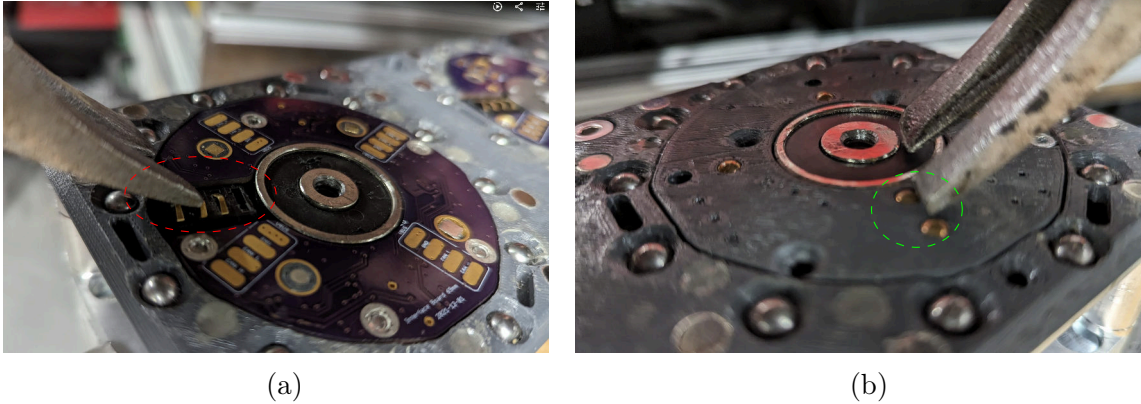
Visual illustration of two versions of the connector that (a) fails the hammer test due to an easily damaged spring loaded connector (*red oval*), and the improved version (b) that uses spring-loaded electrically conductive spheres (*green oval*) that passes it. These spheres are held in by a small lip on the plastic part, and are effective since there is no place to hook onto them, as there is for the blade-style connector shown in (a).
